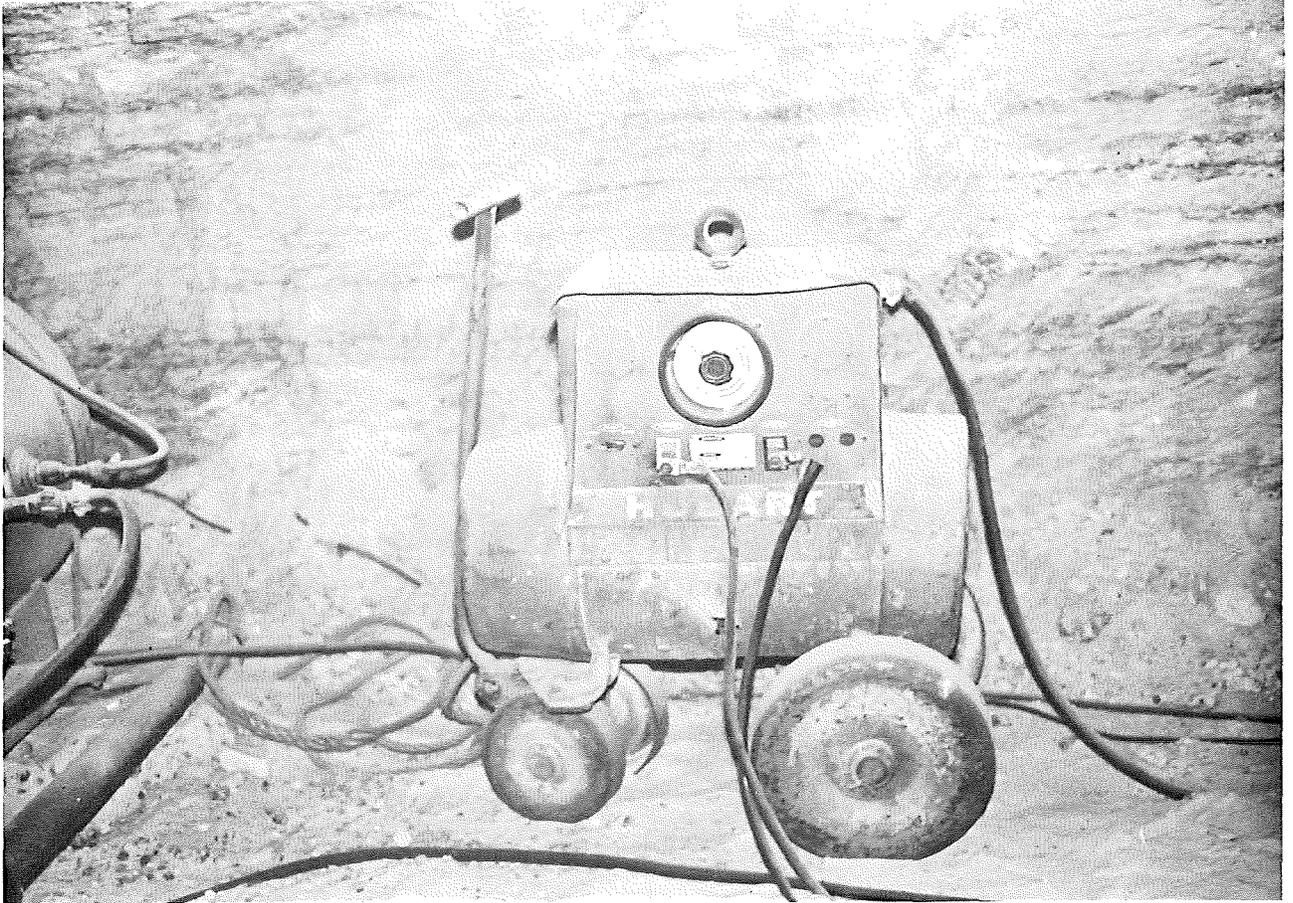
D.C. motor generator welding power supply being used for underground welding.
